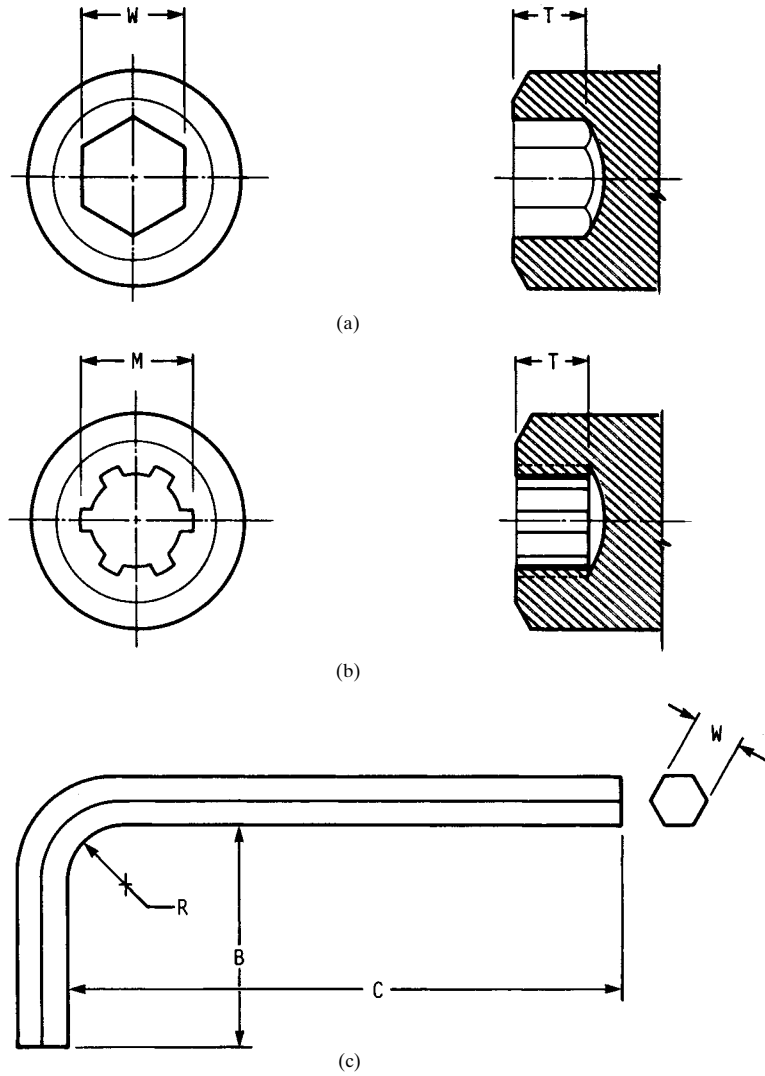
Standard socket shapes. (a) Forged hex socket; (b) forged spline; (c) hex-socket key.
